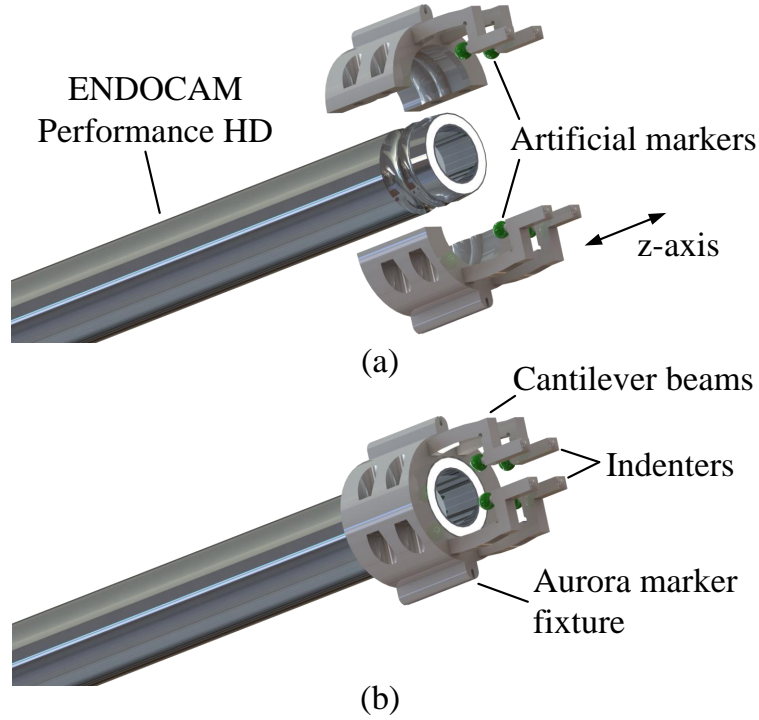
CAD Drawings of the L-shaped stiffness sensor: (a) Exploded view of the sensor and (b) sensor assembled at the tip of an endoscopic camera.
